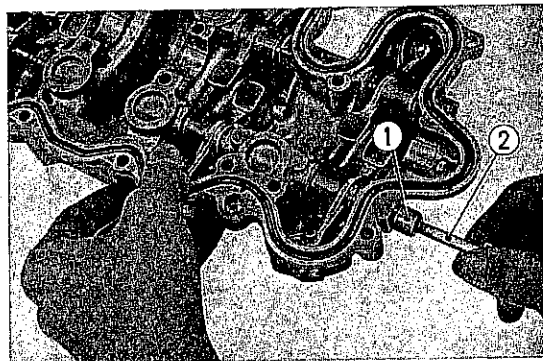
① Rocker arm shaft ② 6 mm bolt
